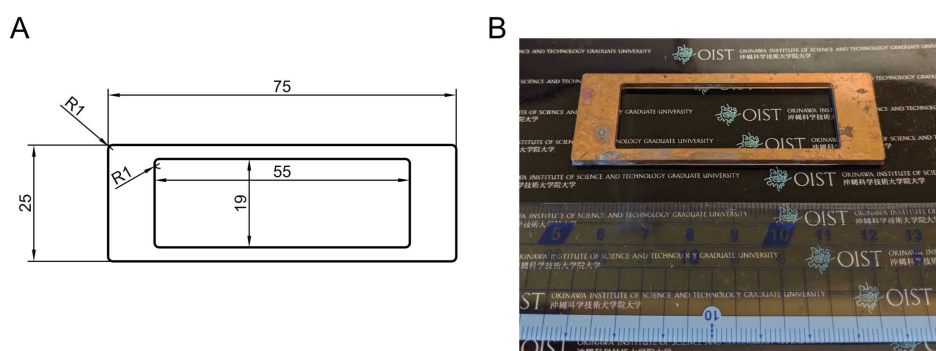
The PDMS lined copper holder. (A) The design layout; (B) The fabricated copper holder.
